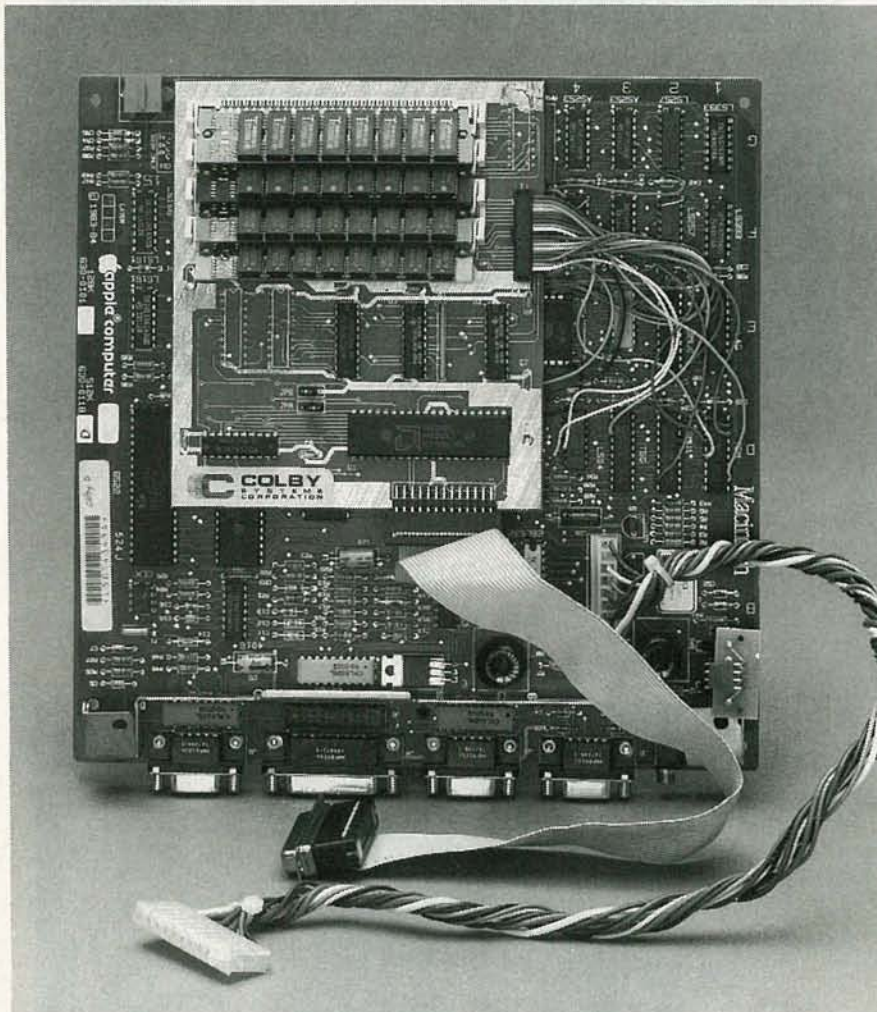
THE COLBY SIMM ADAPTER BOARD requires that 2 DIP's be removed and about 22 wires and a daughter board to be soldered onto the motherboard. It allows you to use standard 256K or 1-MB SIMM's.
